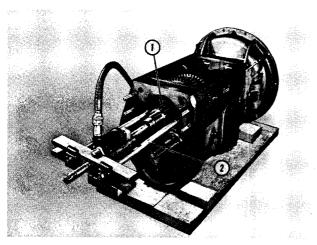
REMOVING MAINSHAFT OVERDRIVE GEAR 1. Overdrive Gear 2. Puller
